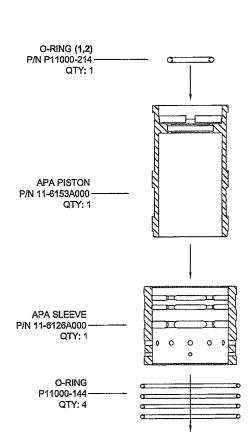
LUBRICATED APA VALVE PART CONFIGURATION.
